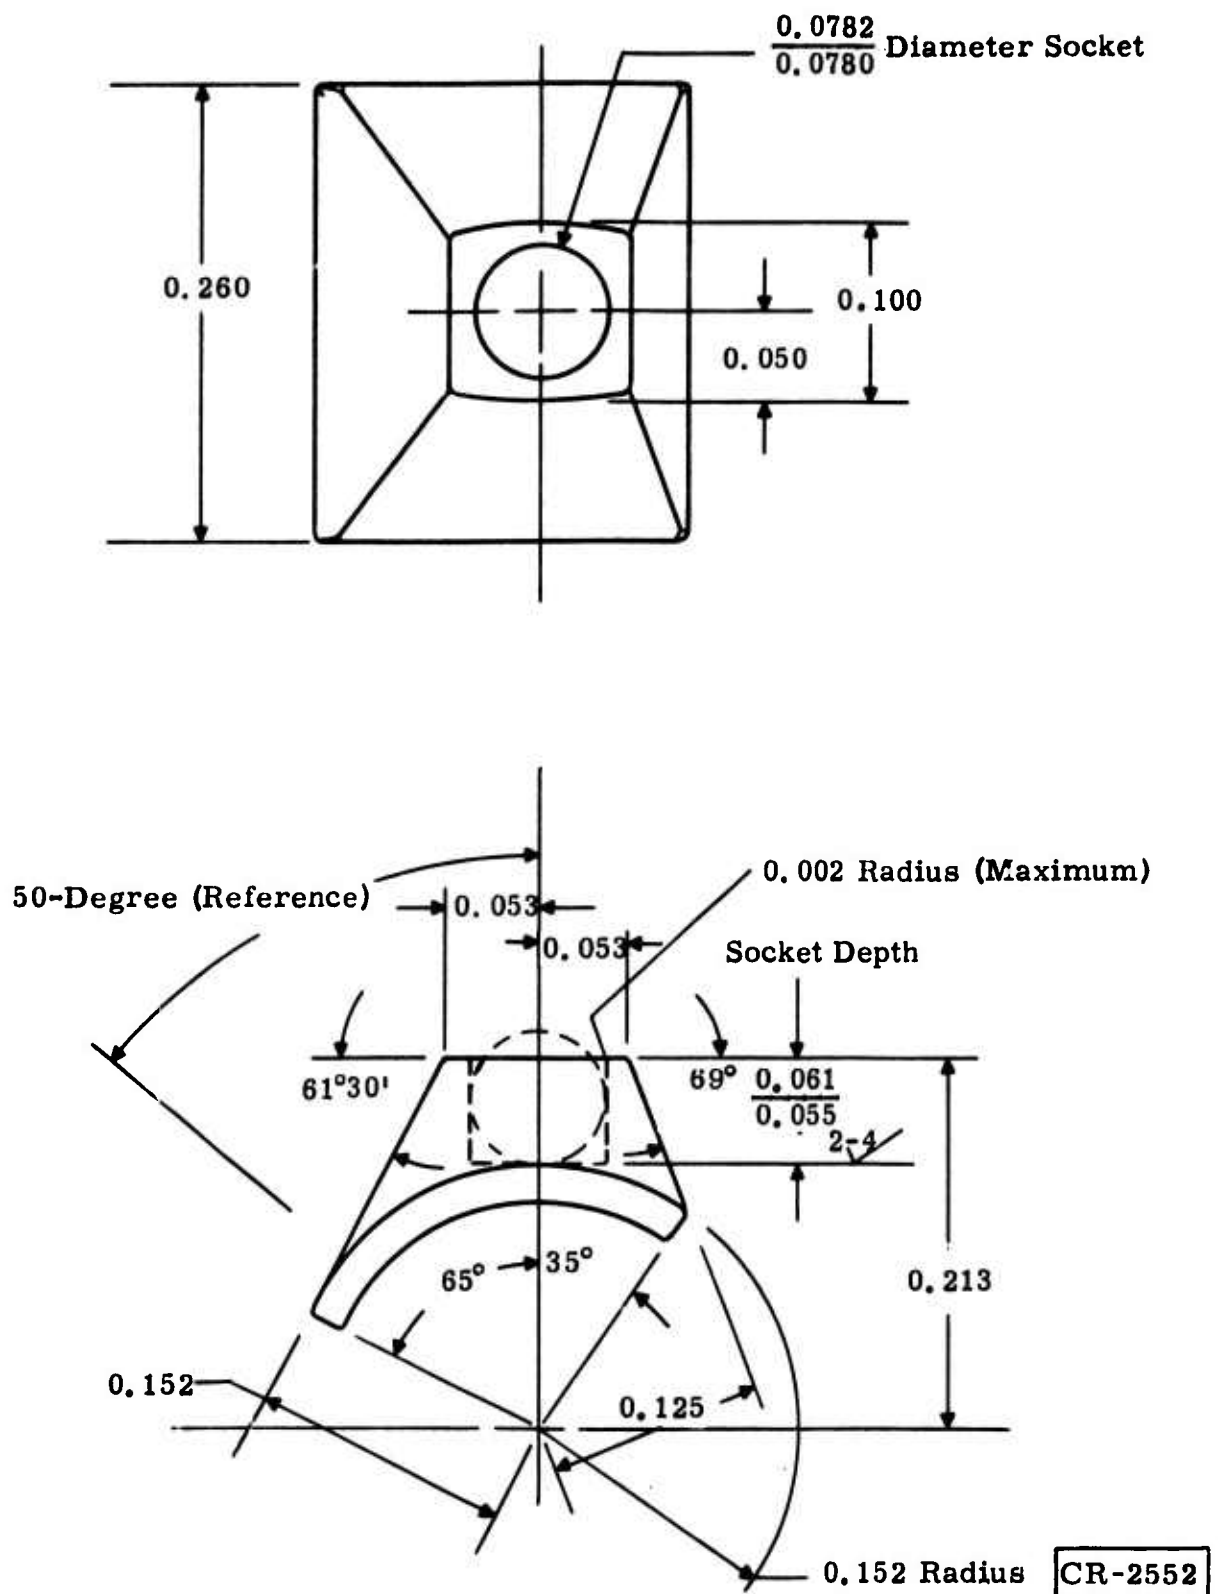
Modified Tilting Pad Journal Bearing (All Dimensions in Inches)
